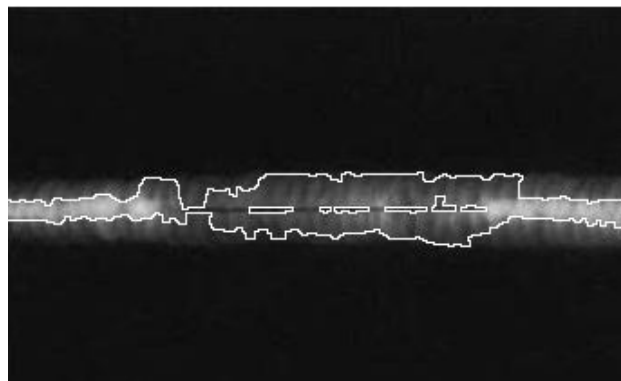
Output Image with Lack of Penetration Welding Defect
